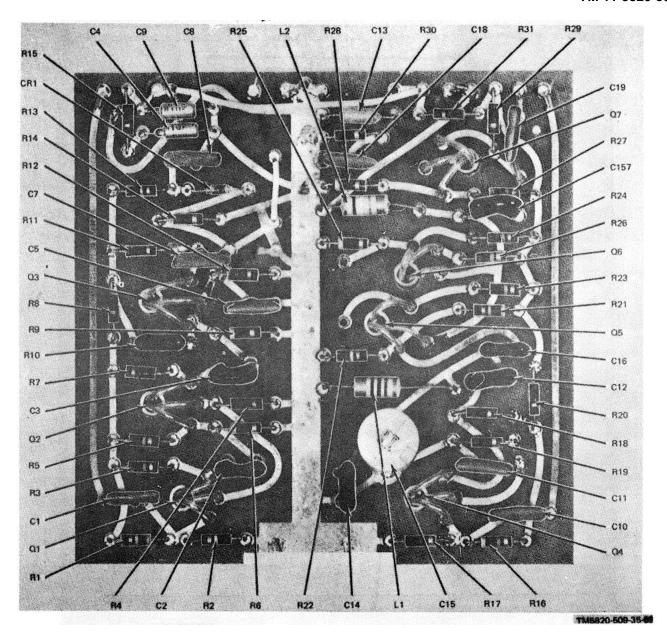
Oscillator Control C-4311/PRC-47 (A8A7), Card Assembly E1.
